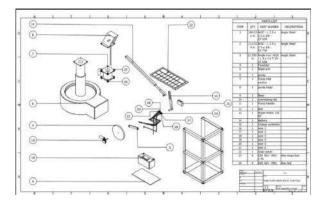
(c): Autodesk exploded design of the solar-powered slider crank mechanism design
